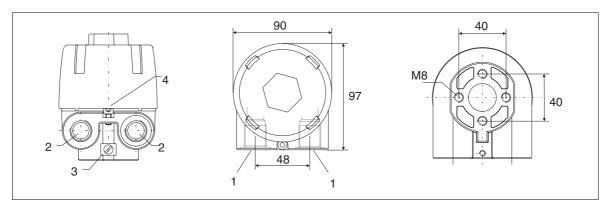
TF202 / TF202-Ex Dimensional drawing (all dimensions in mm)
